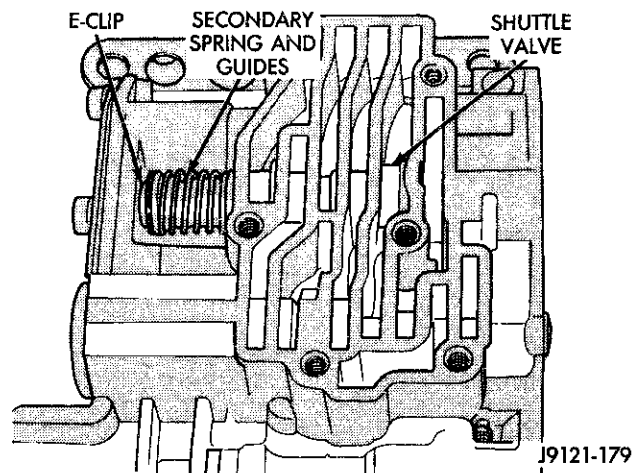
Shuttle Valve E-Clip And Secondary Spring Location
